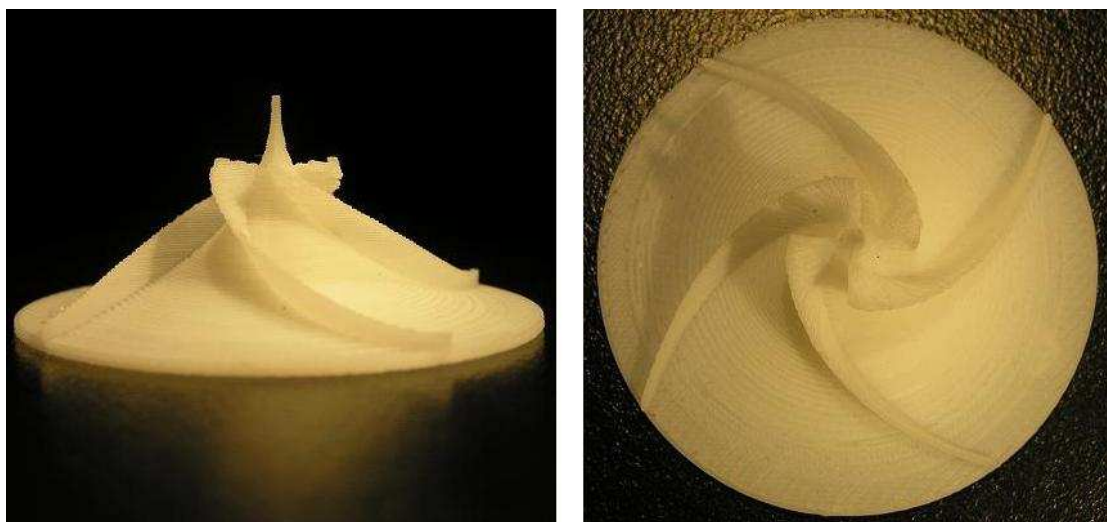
a and b: Example impeller from axial clearance repeat test; Side elevation (left), planar view (right).
